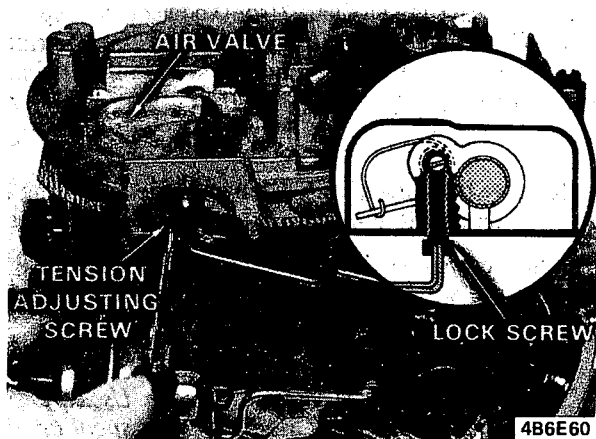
E-80 - Air Valve Spring Wind-up Adjustment
